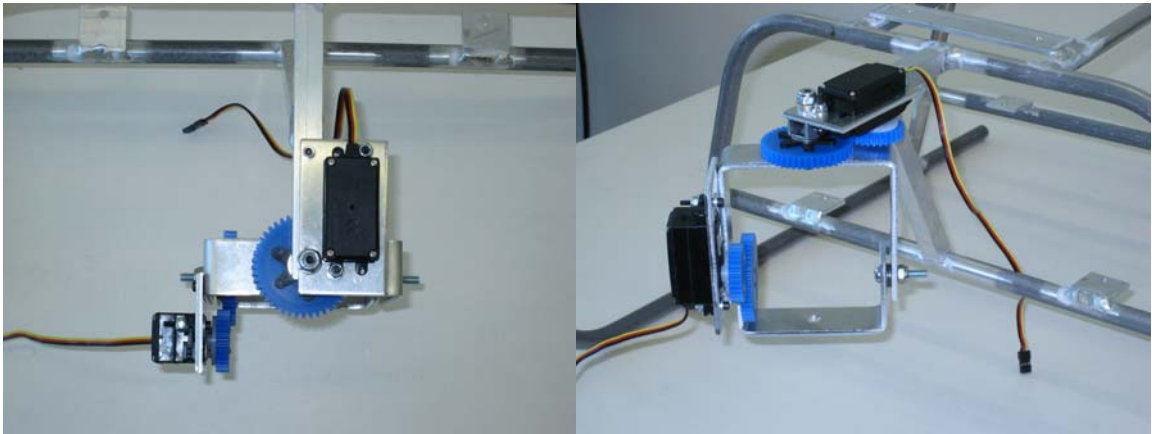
Fully Assembled Pan/Tilt Mounted to Chassis
